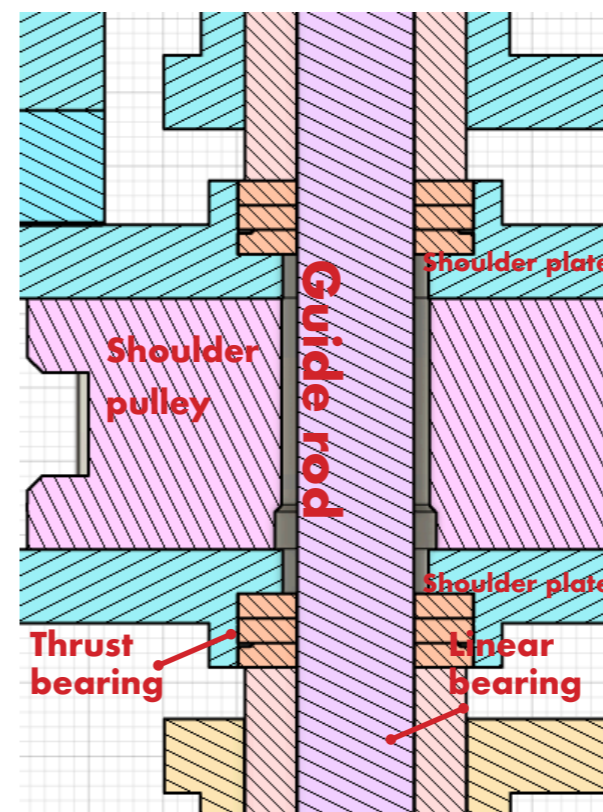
Close-up of the shoulder joint and guide rod connection.
